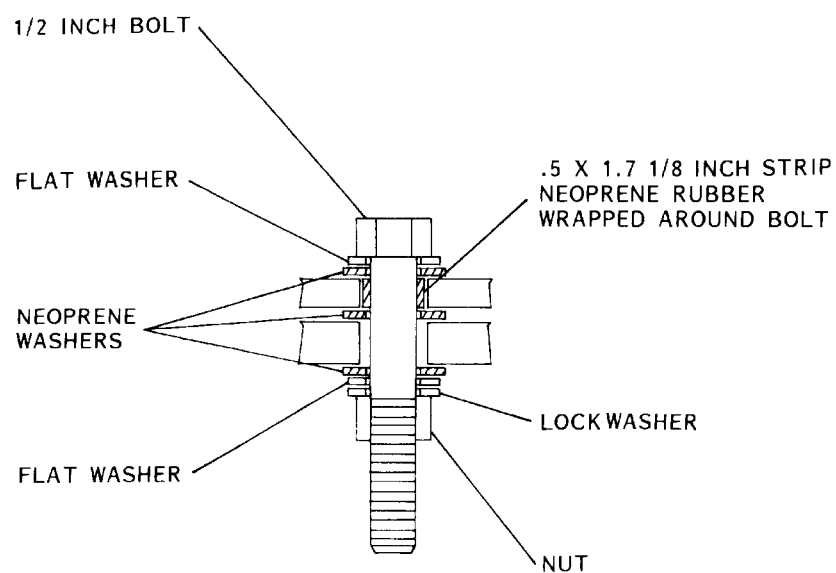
Frame Assembly Mounting Plate Hardware
